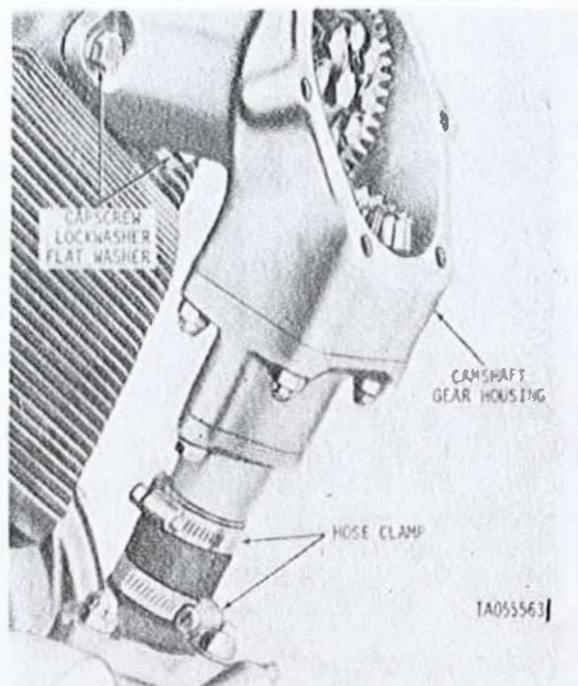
Disconnecting or connecting right camshaft gear housing at cylinder 6R.
